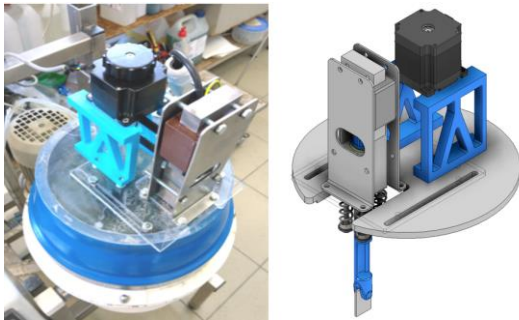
Object holder: a) general view, b) handle mounted on the base based on the working chamber of the EC6 smoothing machine
